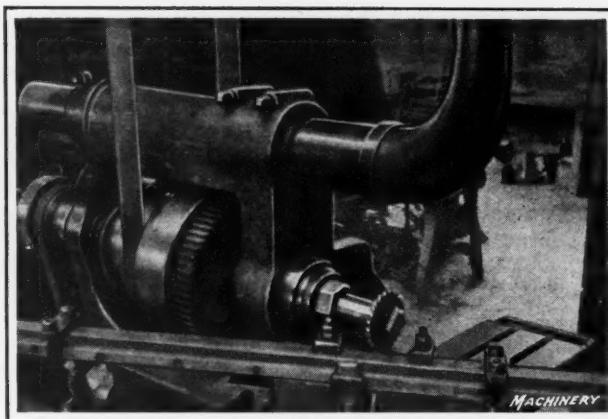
View showing Set-up of Work on Machine Table, and Special Cutter and Arbor employed
